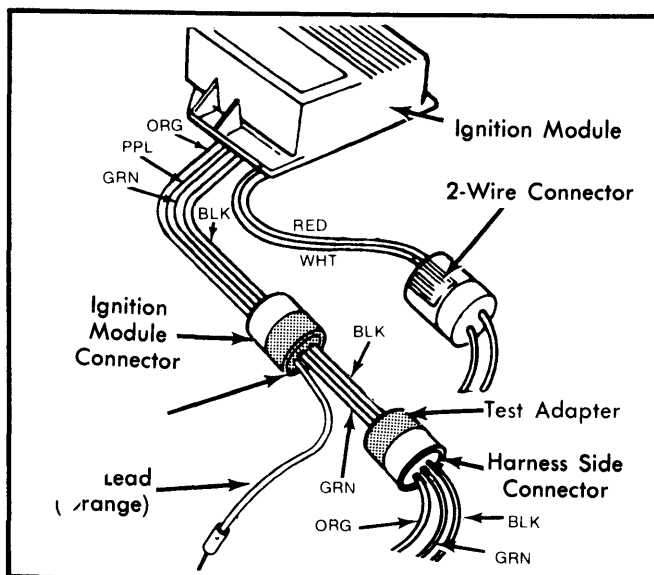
Installation of Test Adapter or Jumper Wires for Performing EEC Diagnosis
